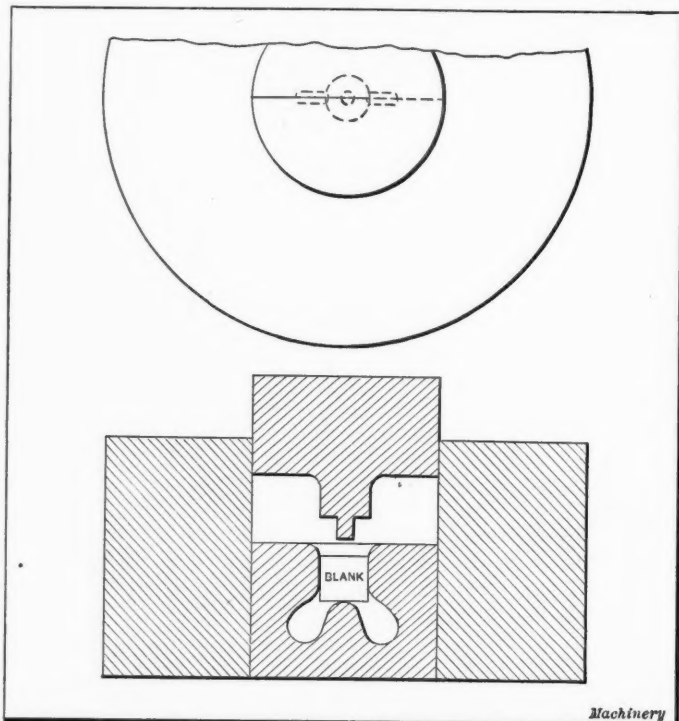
An Extrusion Die, Punch and Ring, with Blank in Position
